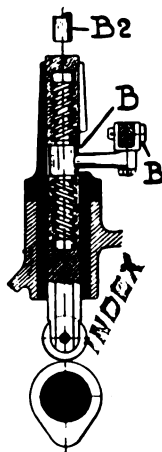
Sectional elevation through the variable-lift mechanism employed on the Métallurgique engine.
